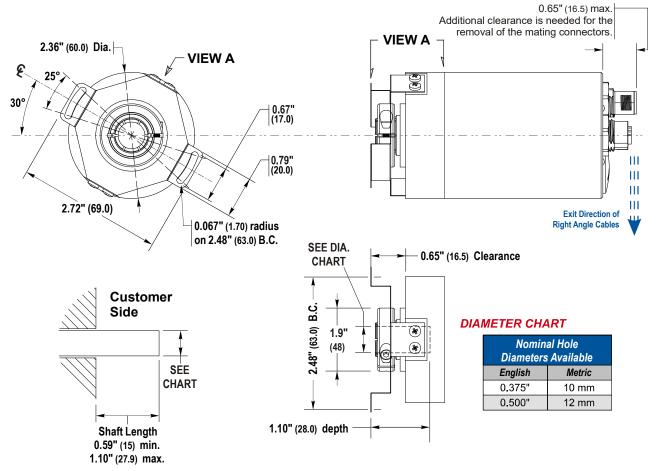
Hub Shaft Mount, Side Connector Outline Drawing
